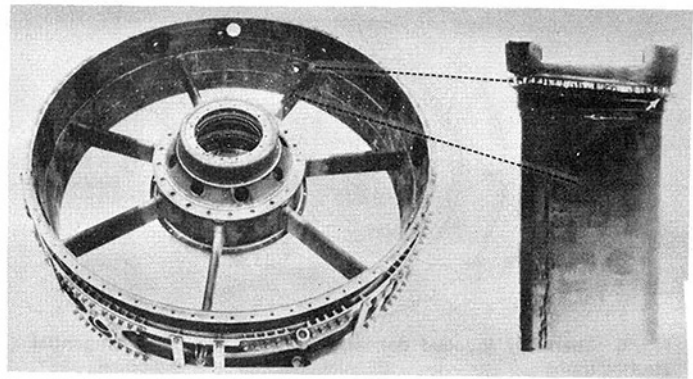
Fatigue crack in frame at strut casing interface
